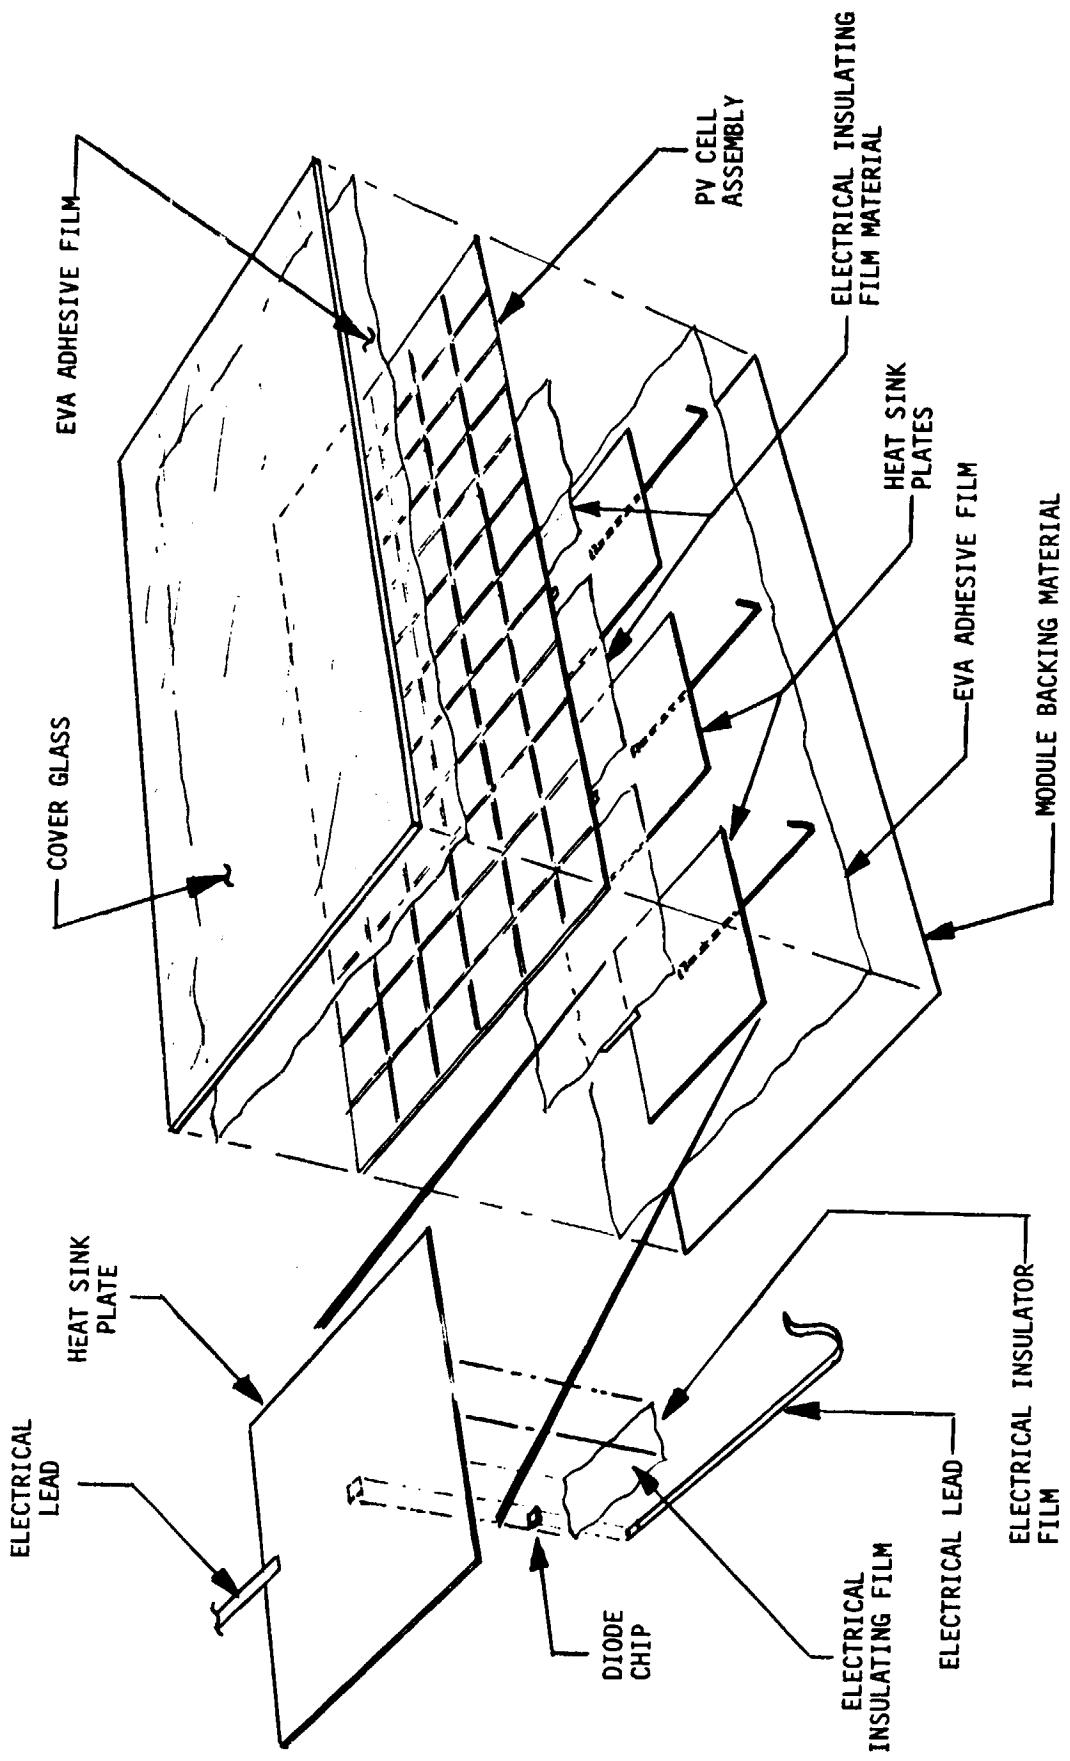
Chip Diode/Heat Sink Encapsulated within the PV Module Assembly
